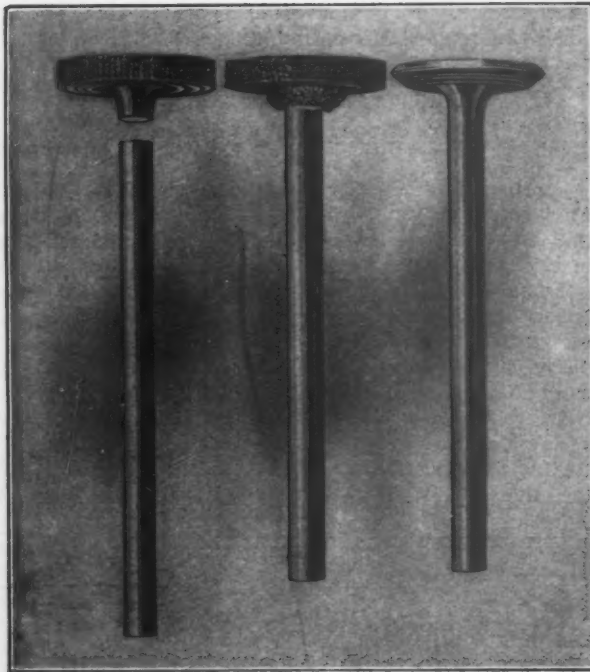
Stages in the Making of a Gas Engine Valve Stem with Nickel Steel Head and Carbon Steel Stem.
